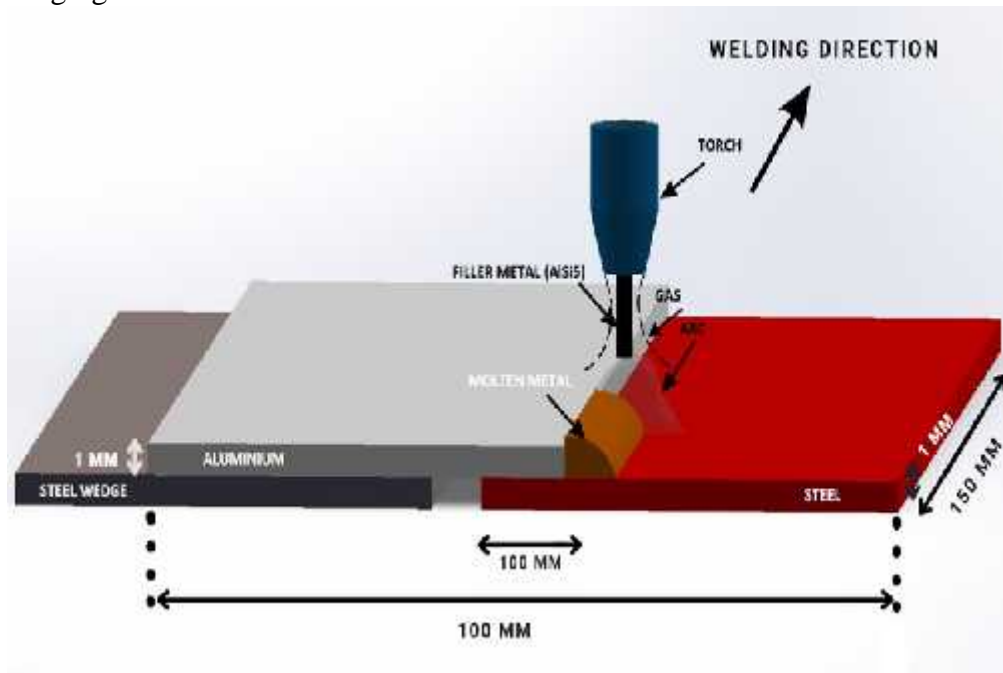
Schematic Diagram of CMT Welding Setup for Dissimilar Aluminum-Steel Lap Joint Configuration [49]
